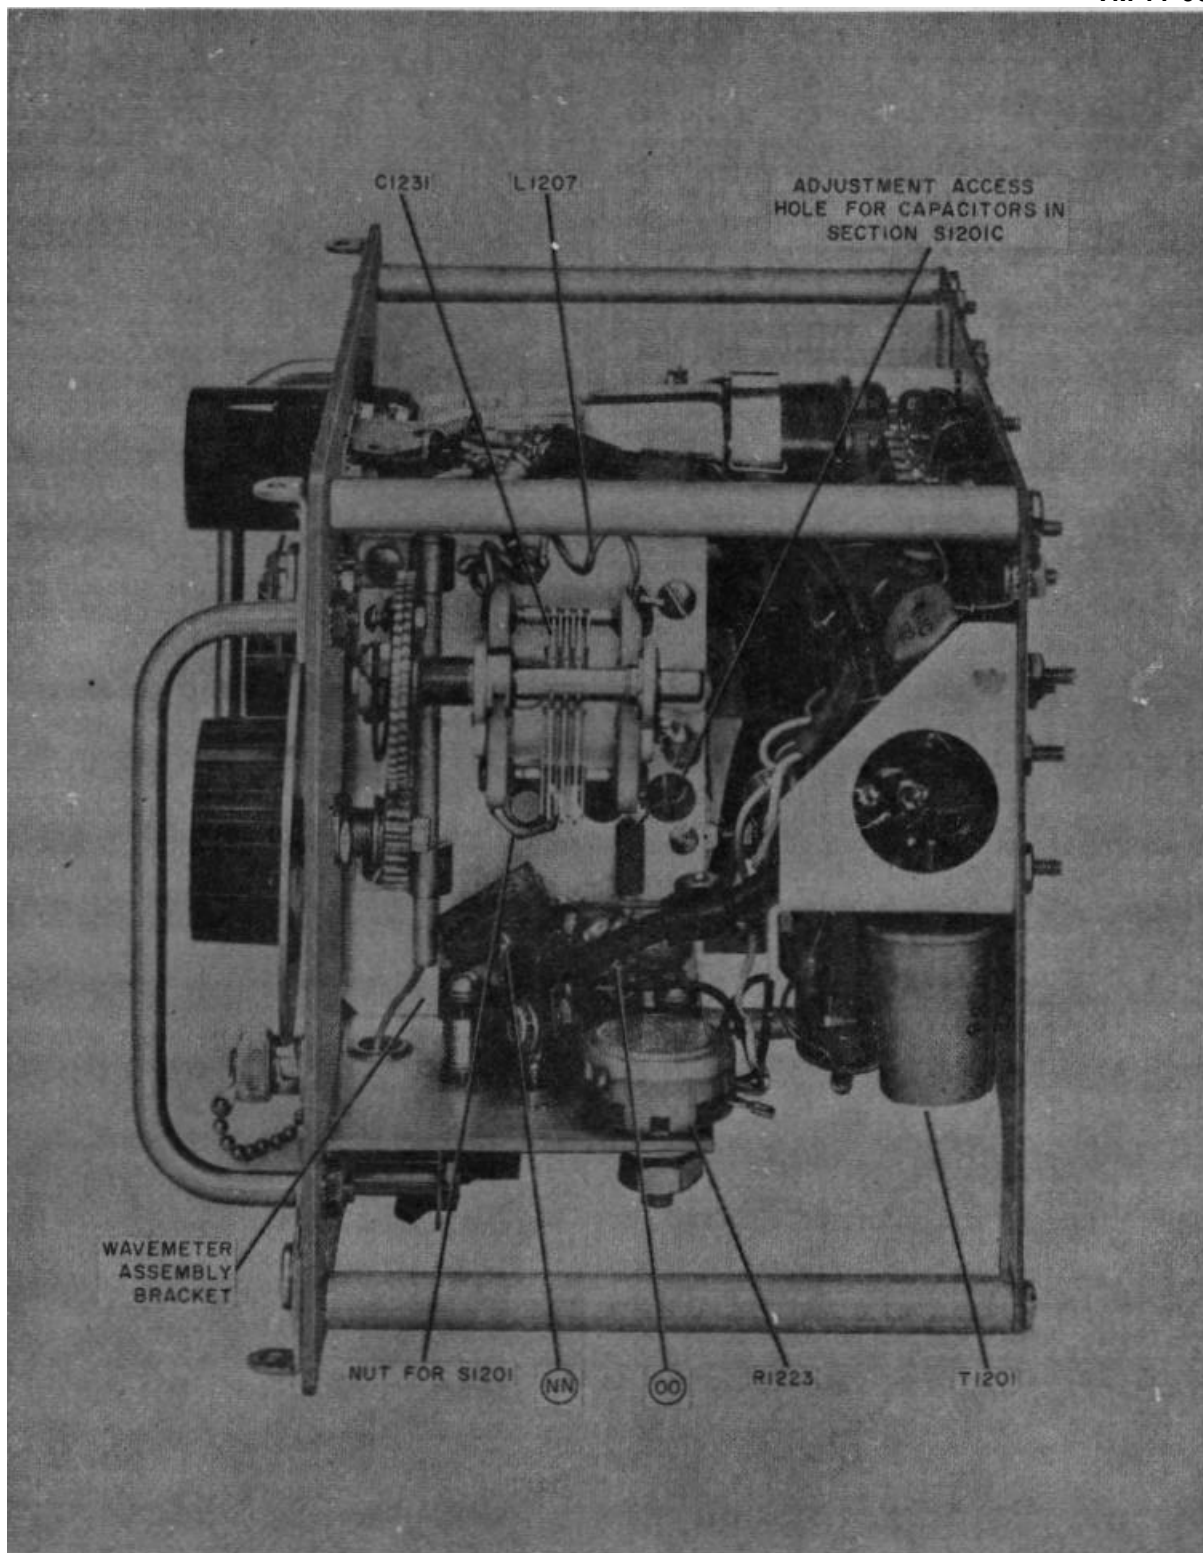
Frequency Converter CV-394/USA-5, Right Side View
